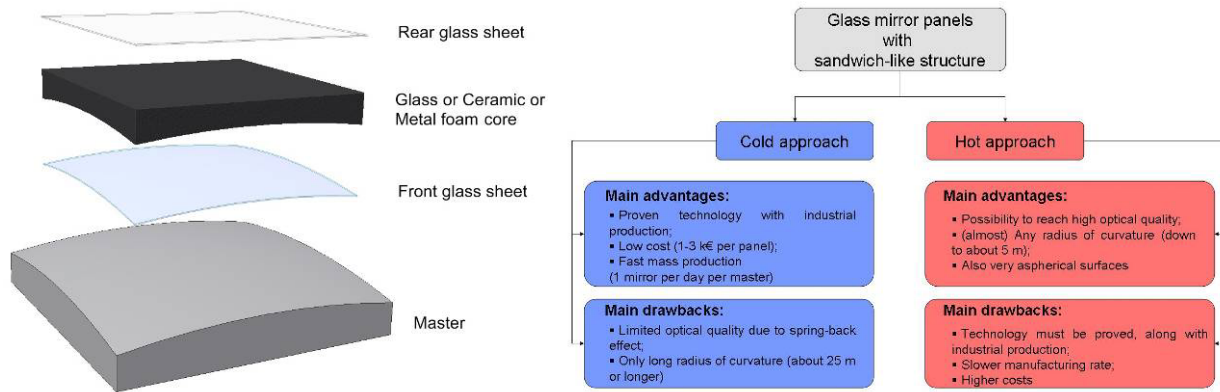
(left) Blow-up sketch showing the principal components of the mirror panels described in this paper. The master is used to shape either with cold or hot approach the front glass sheet. The mirror panel is then assembled gluing the foam board as core and another glass sheet so to realize a sandwich-like structure. (right) Summary of the main pros and cons for the described technologies.
